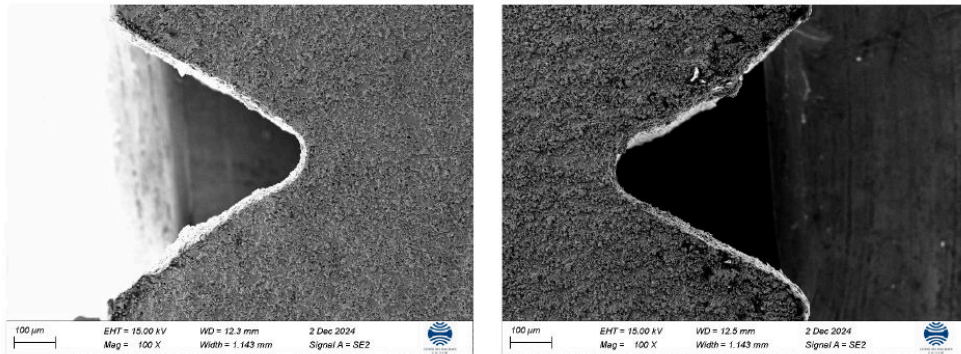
Examples of side-grooves machined in a mDCT specimen.
